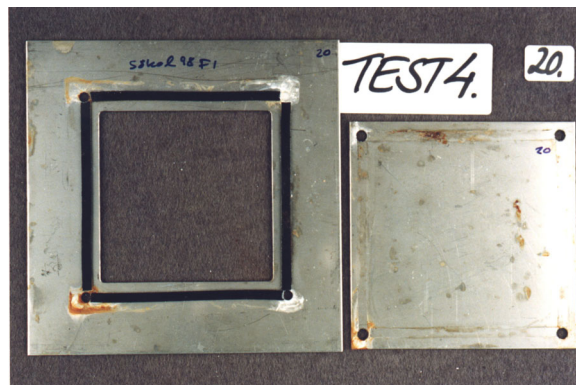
Object L20: Stainless steel plate and lid, carbon filled PTFE gasket, 3.2x1 mm (supplied by Gore). After exposure to corrosion test 4 [9].
